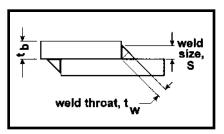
Welds of double fillet-welded lap joint are evaluated individually.
